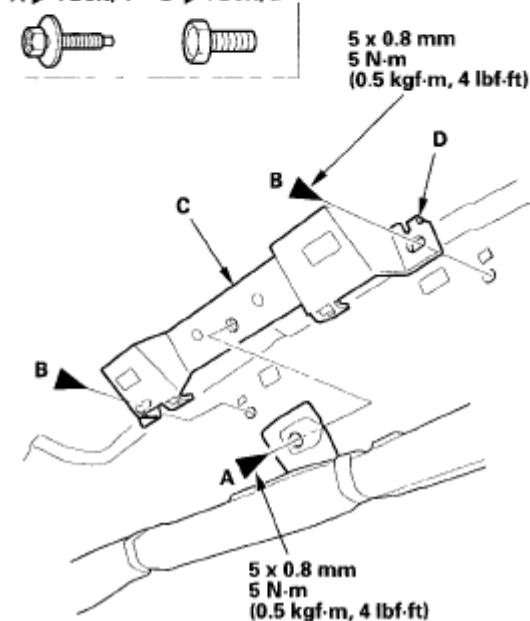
Removing Side Curtain Airbag Mounting Bolt And Grab Handle Bracket Mounting Bolts (With Specifications)
